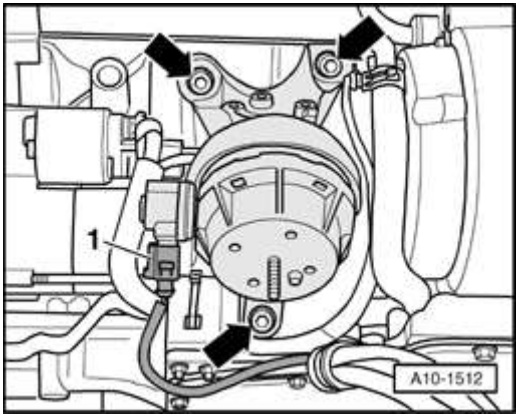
Disconnecting Electrical Harness Connector At Right Engine Mount
